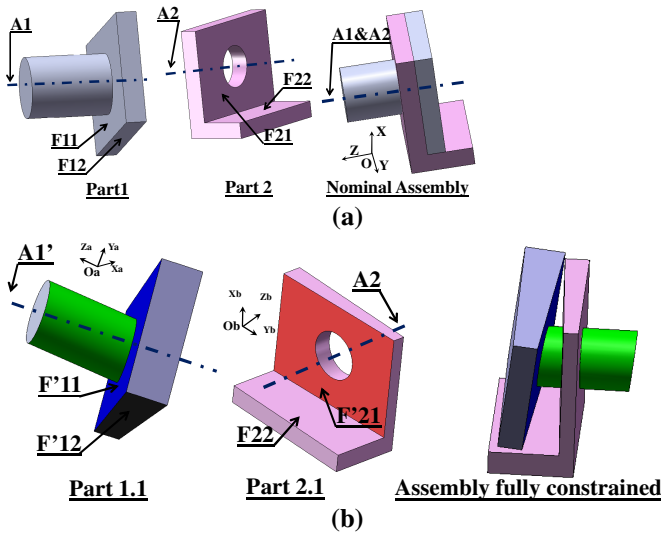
(a) Nominal assembly. (b) Assembly with defects.
